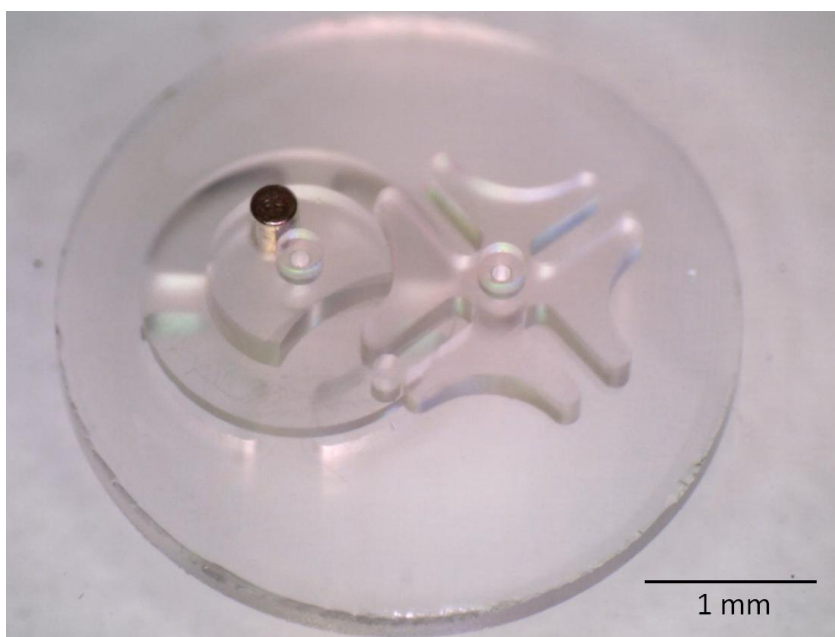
Photo of free rotateable assemble-free Geneva mechanism made out of single piece of fused silica by using SLE method.
